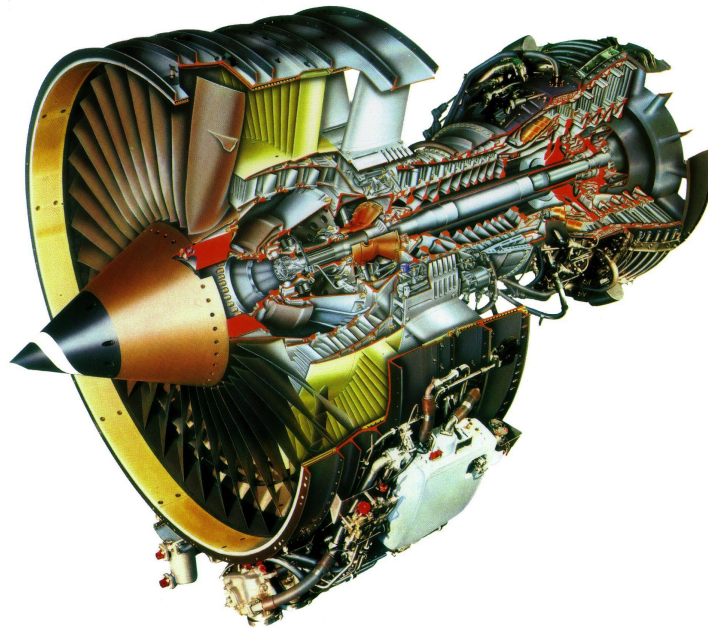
Cutaway drawing of a CFM56 engine, reproduced from [46].
